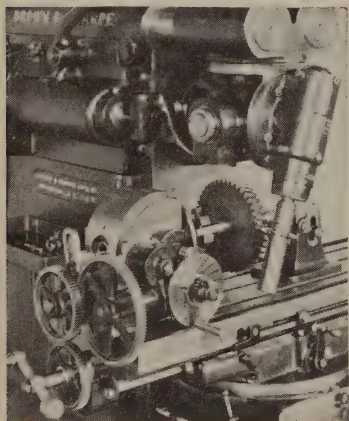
Cutting teeth in a spiral gear, using compound vertical milling attachment swung to angle of spiral. Table is not swiveled.
